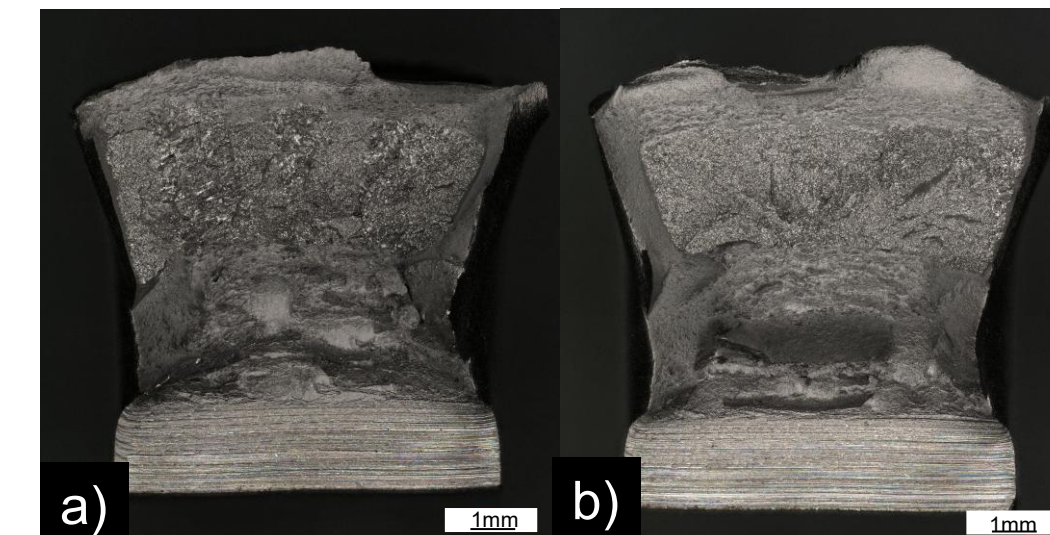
Fracture surfaces a) Green set 1 b) Green Set 2.
